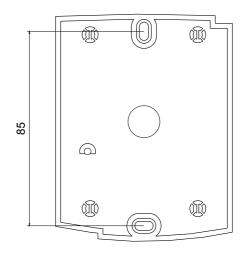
The front view and the drawing of the ACM08E sensor mounting
